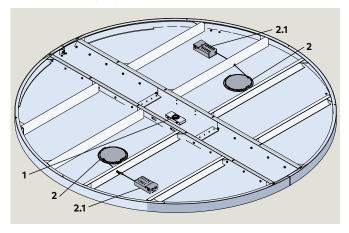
3 section canopy assembly, top view, covers removed
